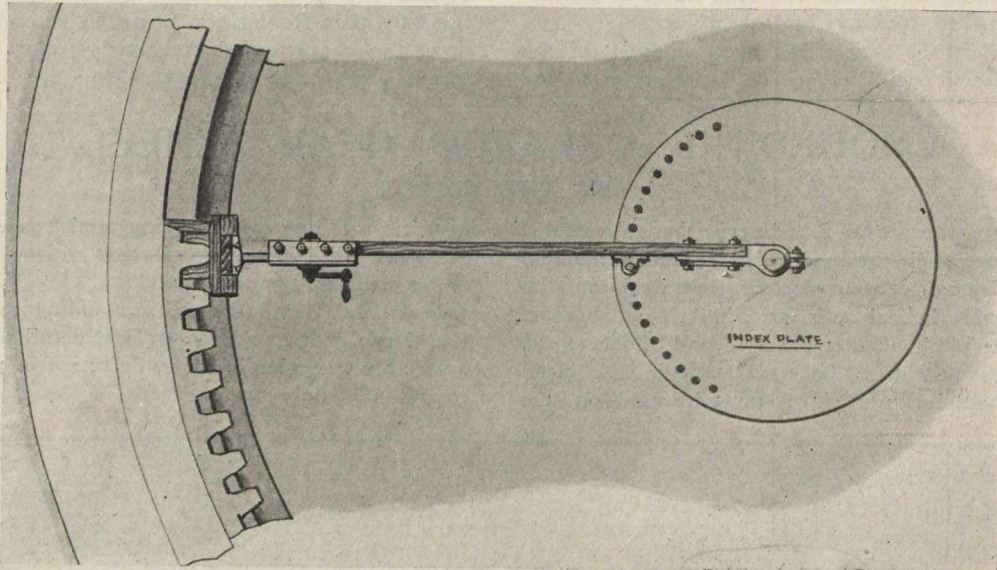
Plan of Groves' Portable Gear Moulding Machine.
